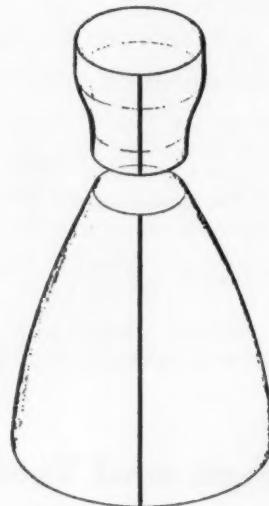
Difficult-to-spin symmetrical parts that can be readily produced by explosive forming.
